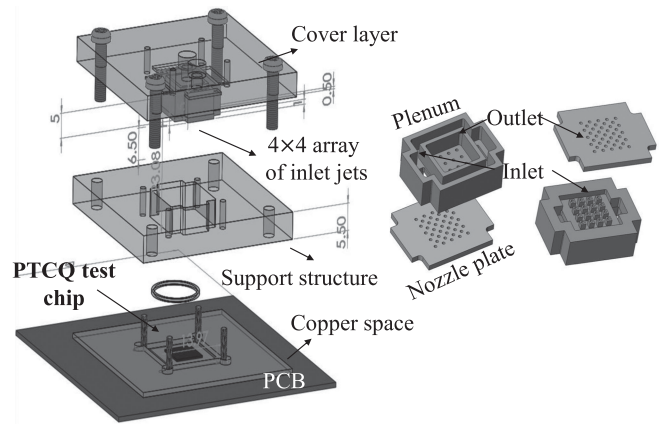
CAD design structure of the  $4 \times 4$  array demonstrator of the impingement cooler and integration on the test chip and PCB.
